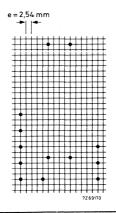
Hole pattern for mounting on a printed-wiring board (solder side).
